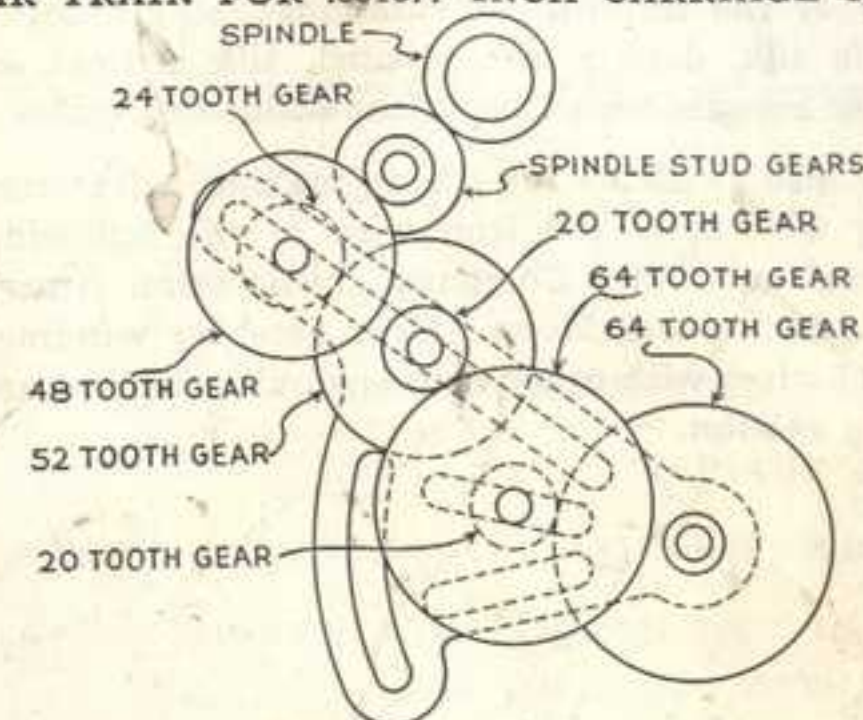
Gear set-up for .001877 inch carriage feed (see page 34).
